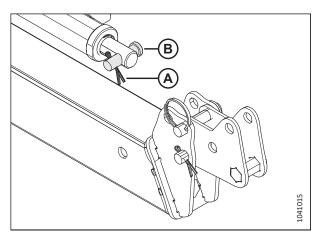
Shipping Location of Pins in Right Fore-aft Cylinder
